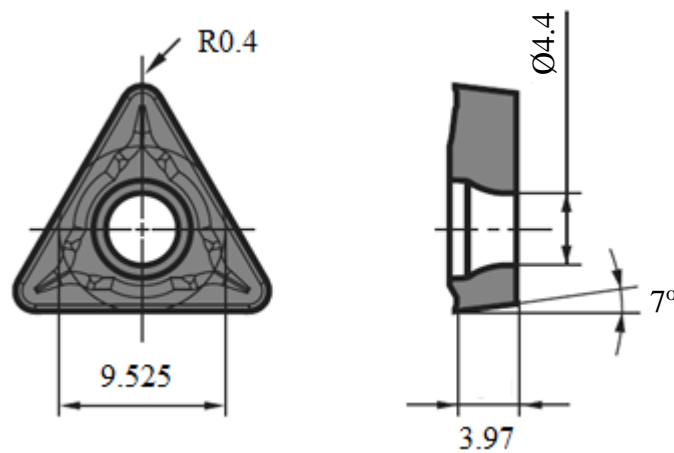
Geometry of the tool insert (all dimensions are in mm)
